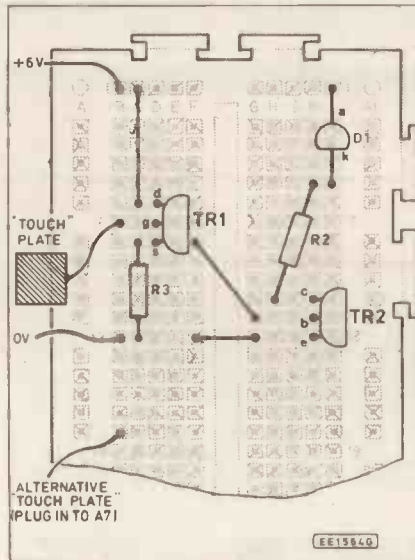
Demonstration breadboard component layout for the FET Touch Switch.
